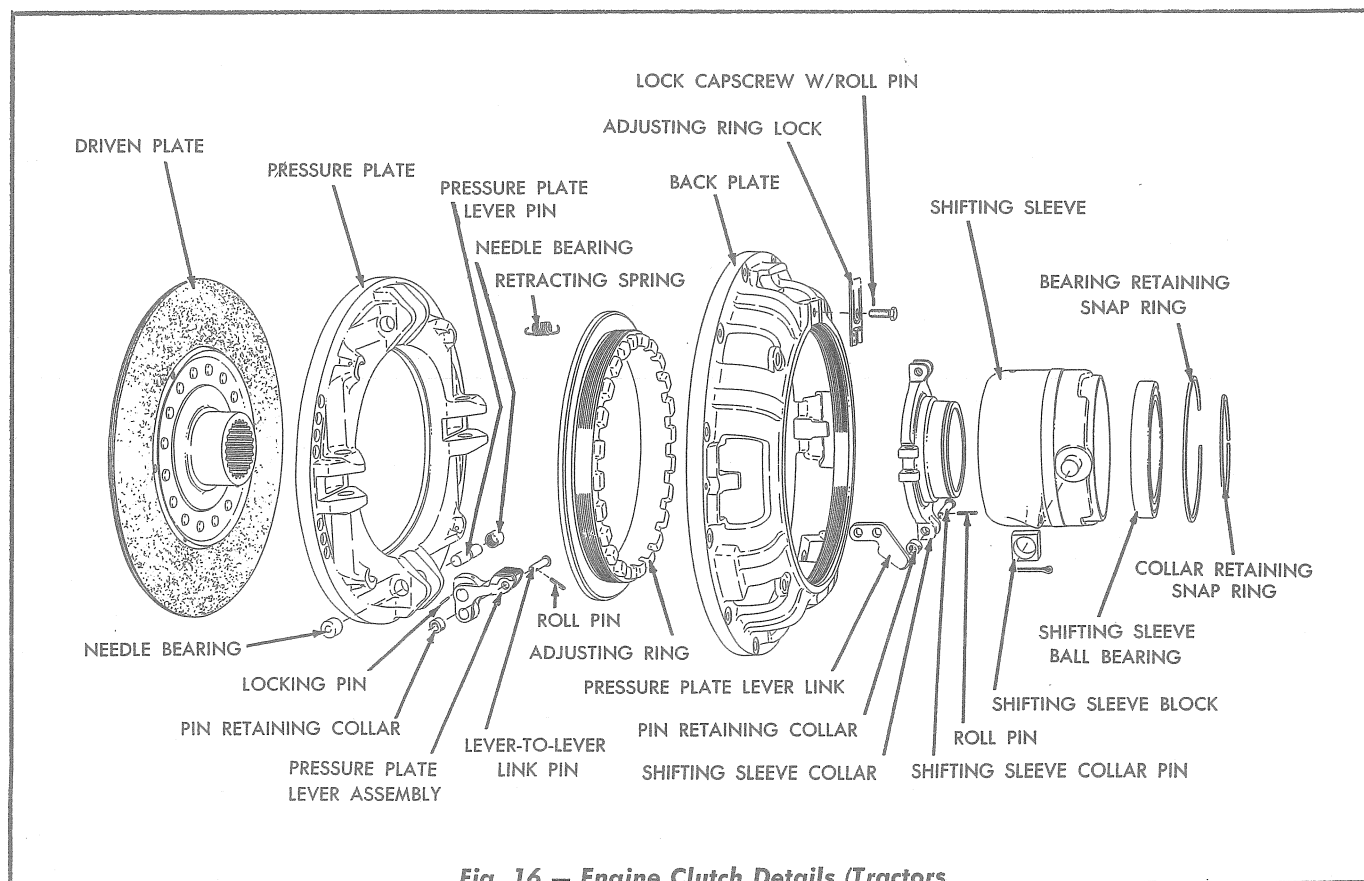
Engine Clutch Details (Tractors with Torque Converter)
